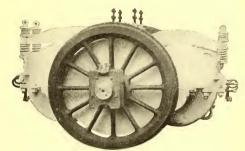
RUNNING AXLE CARRYING TWO MOTORS
